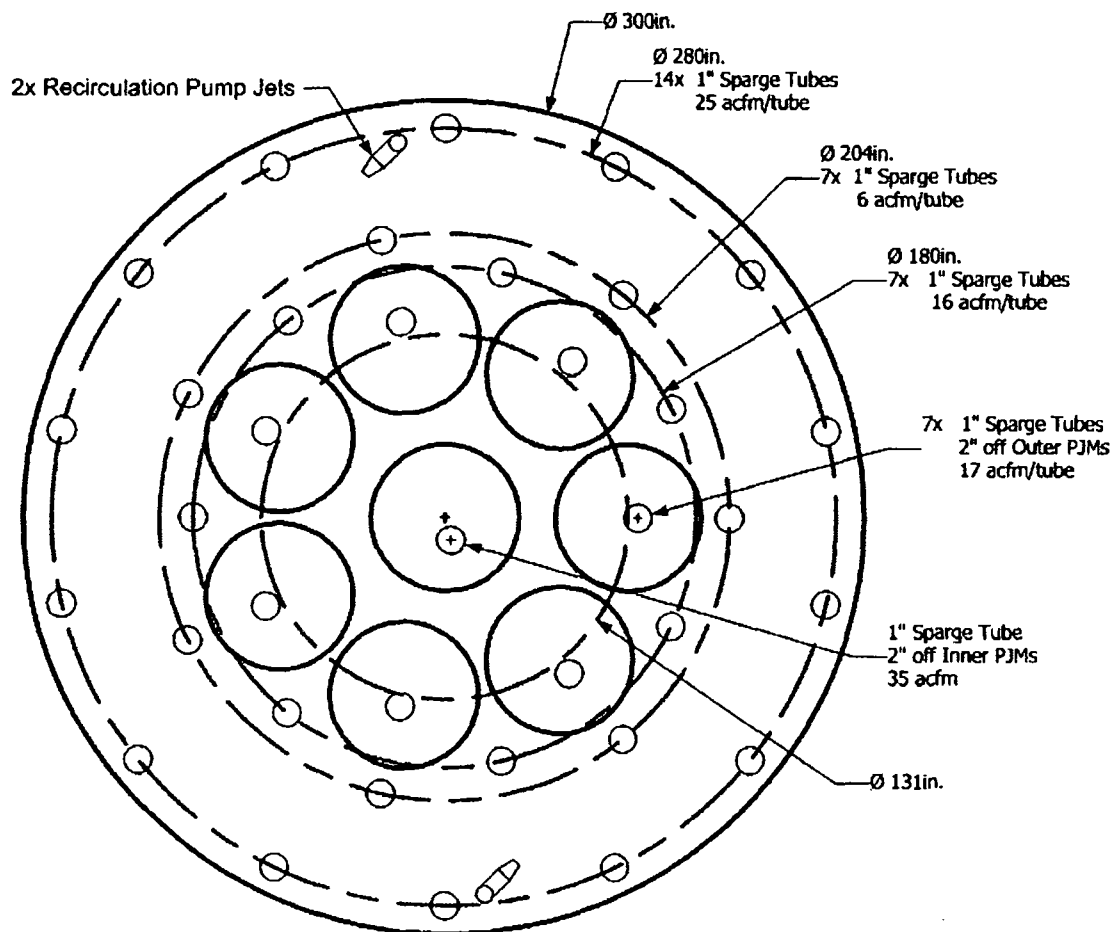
HLP-VSL-00027A/B Mixing System Layout – Plan View
